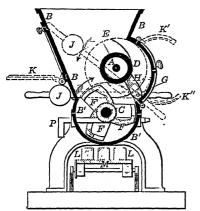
Schlickeysen peat briquetting machine. Section through feed-hopper.
